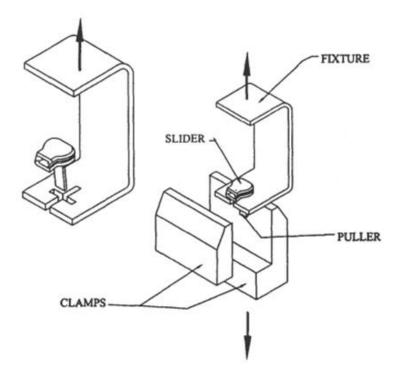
SECURITY OF ATTACHMENT TEST FOR PULLER
